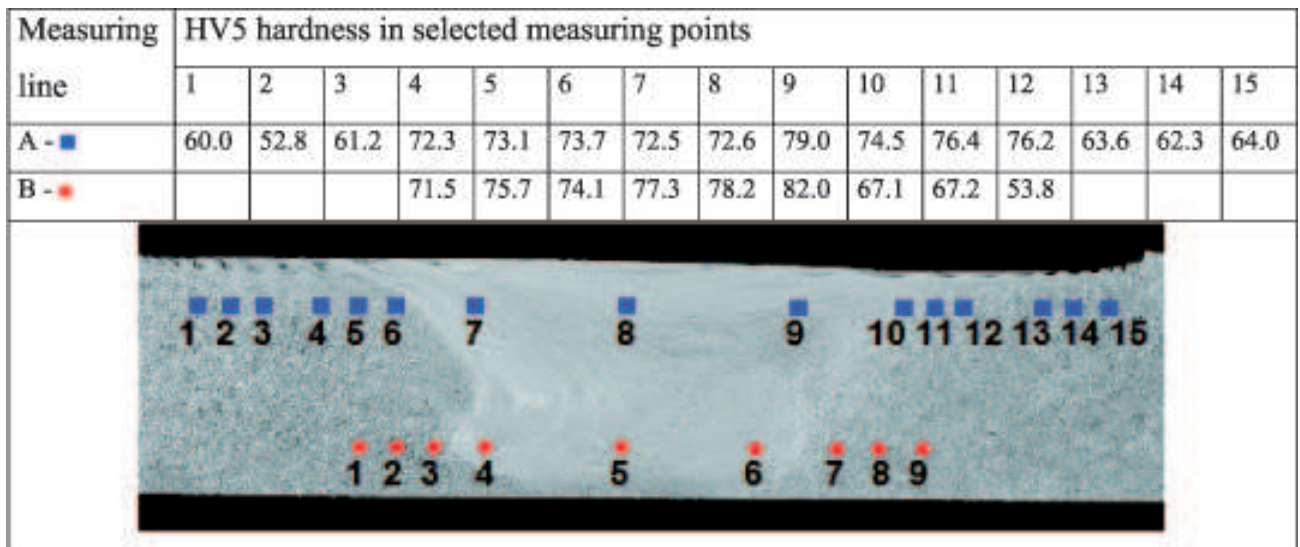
Hardness measurement in sections of FSW joint. Conical tool. Welding parameters – item 3 of Table 1
